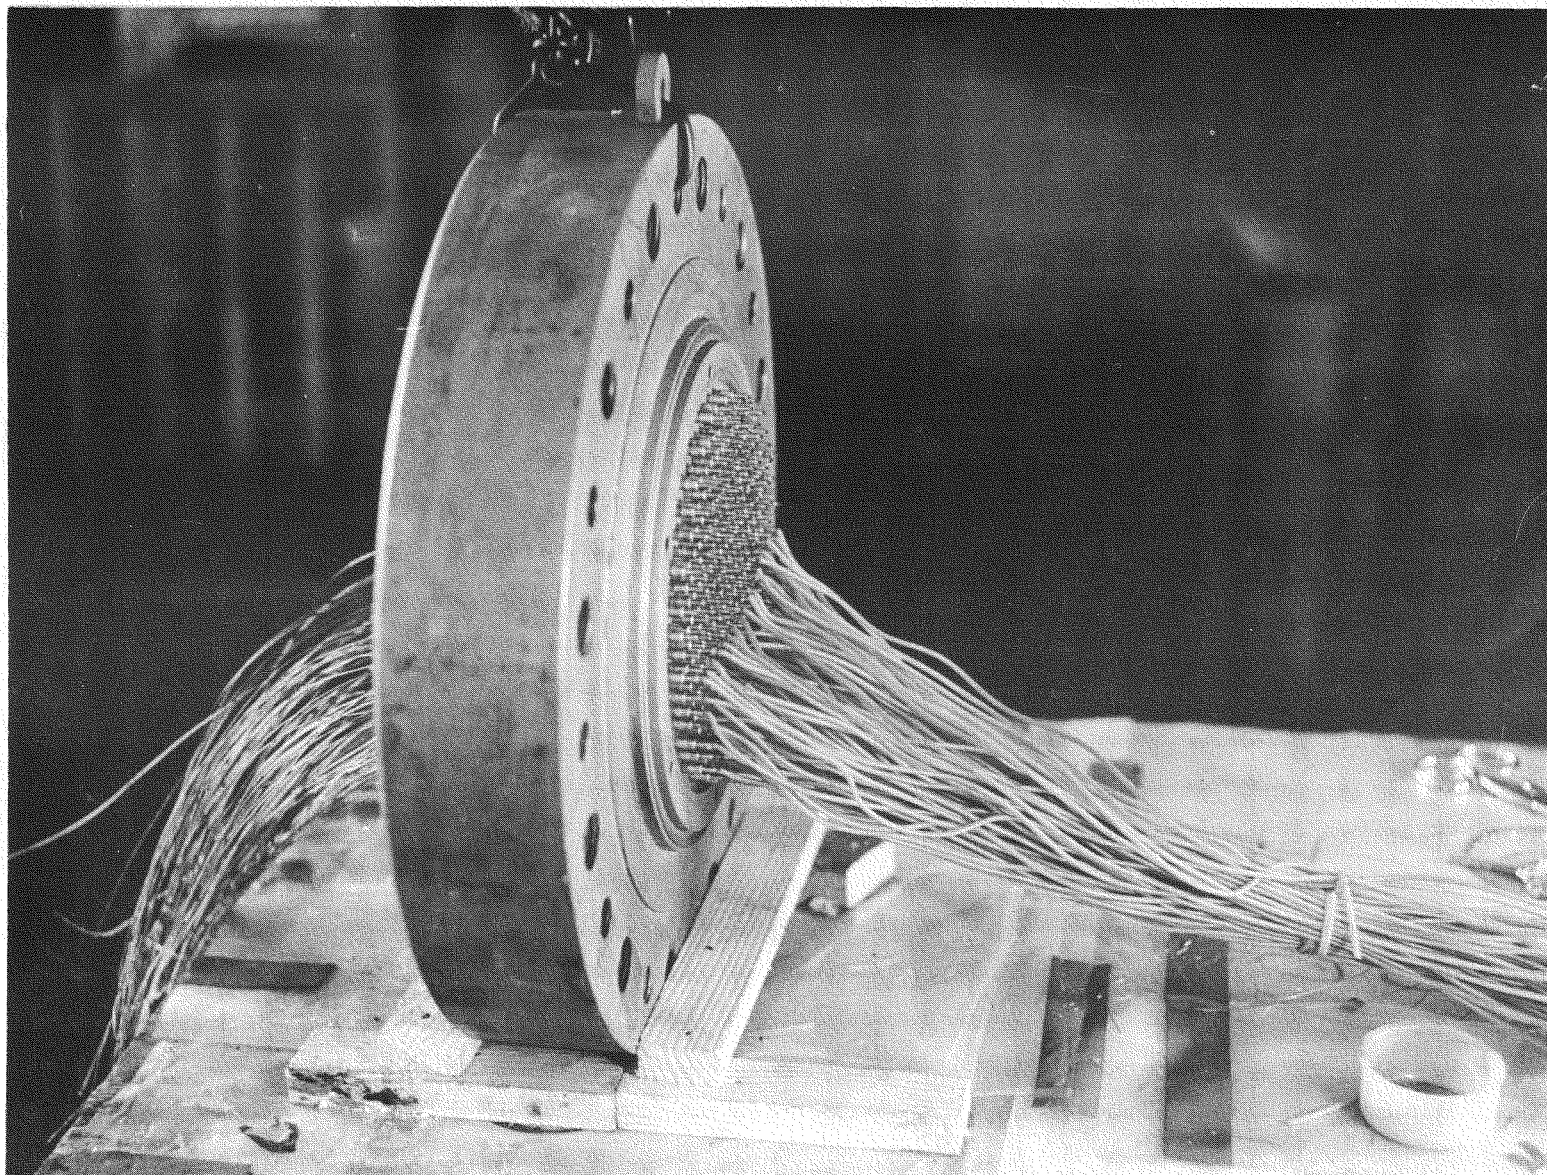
A. FERRANTI THERMOCOUPLE PENETRATION PLATE 240 METAL CERAMIC SEALS
